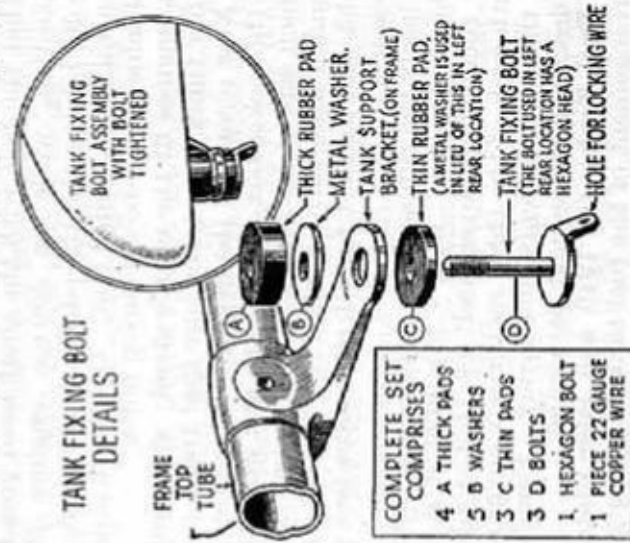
FUEL TANK FIXING BOLT ARRANGEMENT (1949) MODELS
